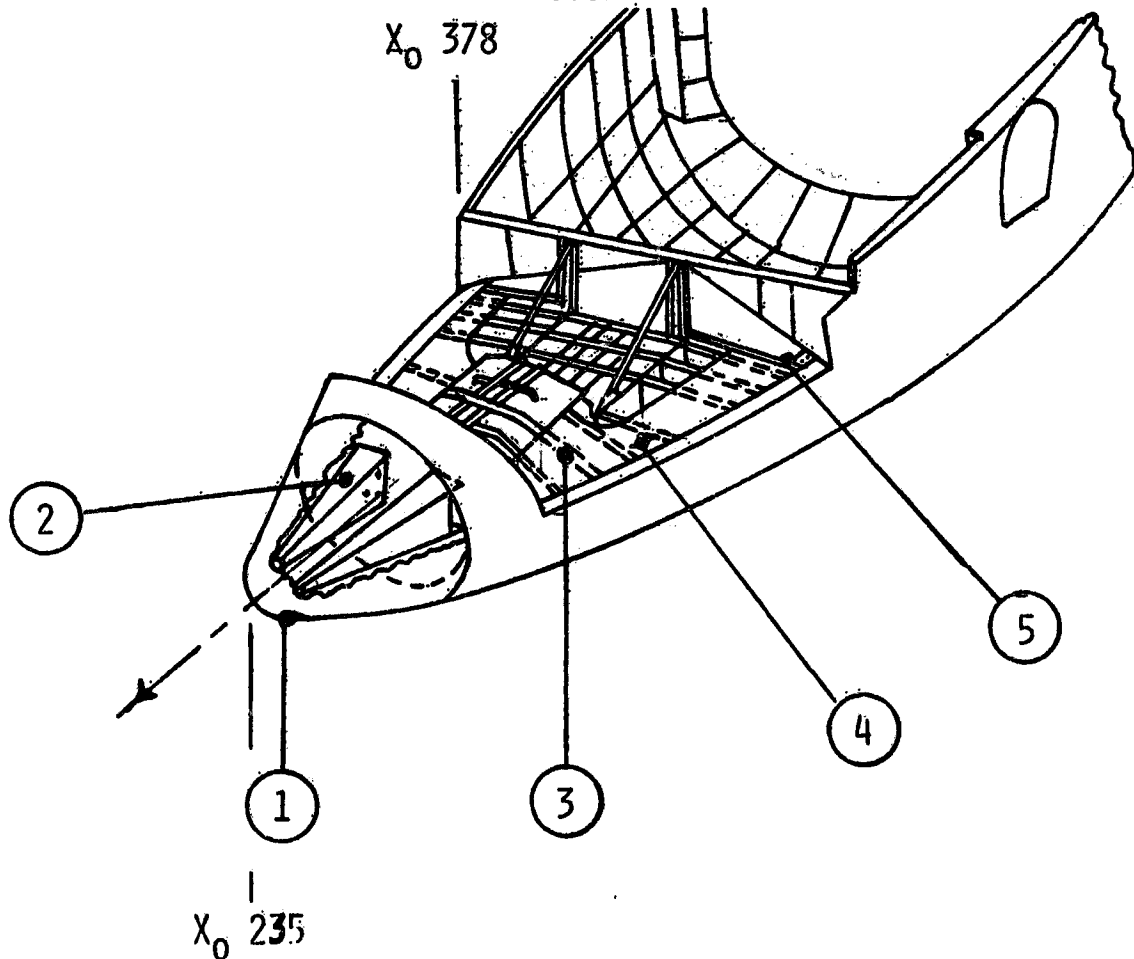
STRUCTURAL REINFORCEMENT FOR ATTACHMENT LOADS
